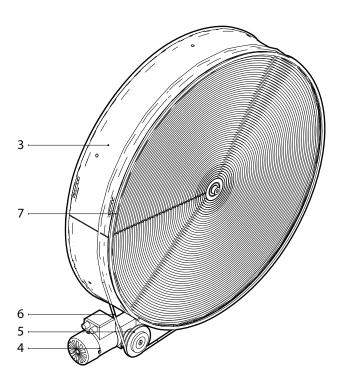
Rotary heat exchanger assembly 1 – C5 controller main board, 2 – automatic circuit breakers, 3 – rotary wheel, 4 – motor with gearbox, 5 – pulley for rotor belt, 6 – rotor belt, 7 – sealing brushes
